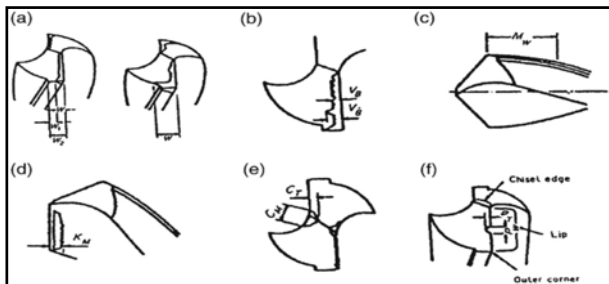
Types of drill wear: (a) outer corners, (b) flank, (c) margin, (d) crater, (e) chisel edge and (f) chipping [6].
